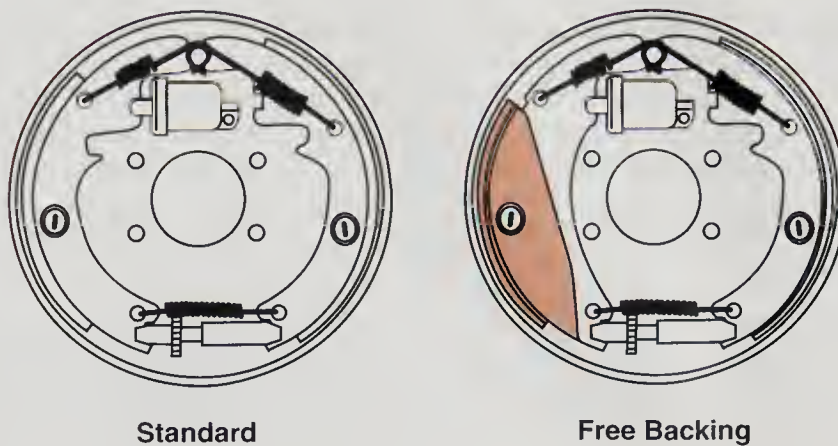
The free backing brake on the right recognizes reverse movement and the brake cannot be applied. (Courtesy of Champion Trailer Parts Supply)
